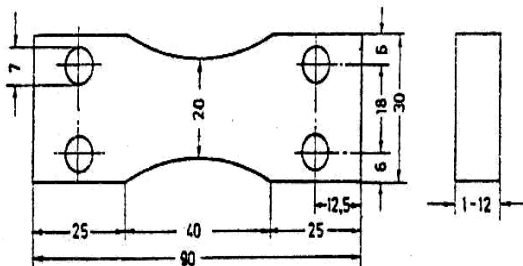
Shape of fatigue test specimen with dimensions in mm.
